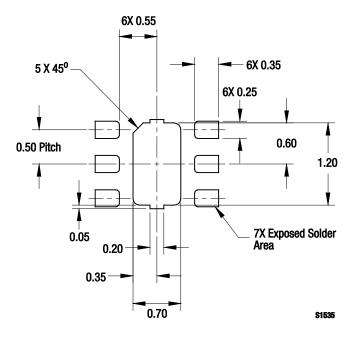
SKY13381-374LF PCB Layout Footprint (Top View)
